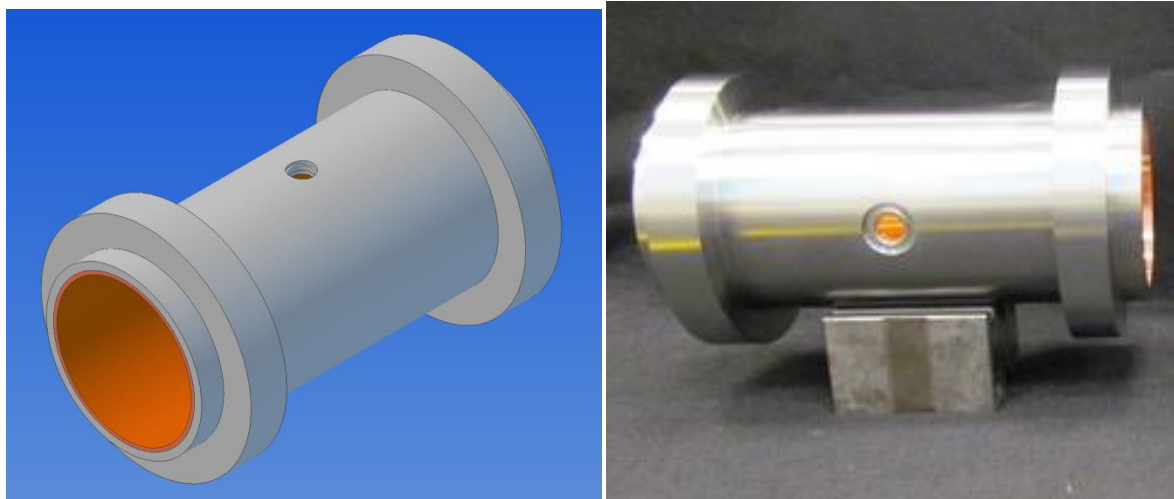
Shown is a graphical representation and the actual machined part of the Explosion Bonded assembly after final machining.
